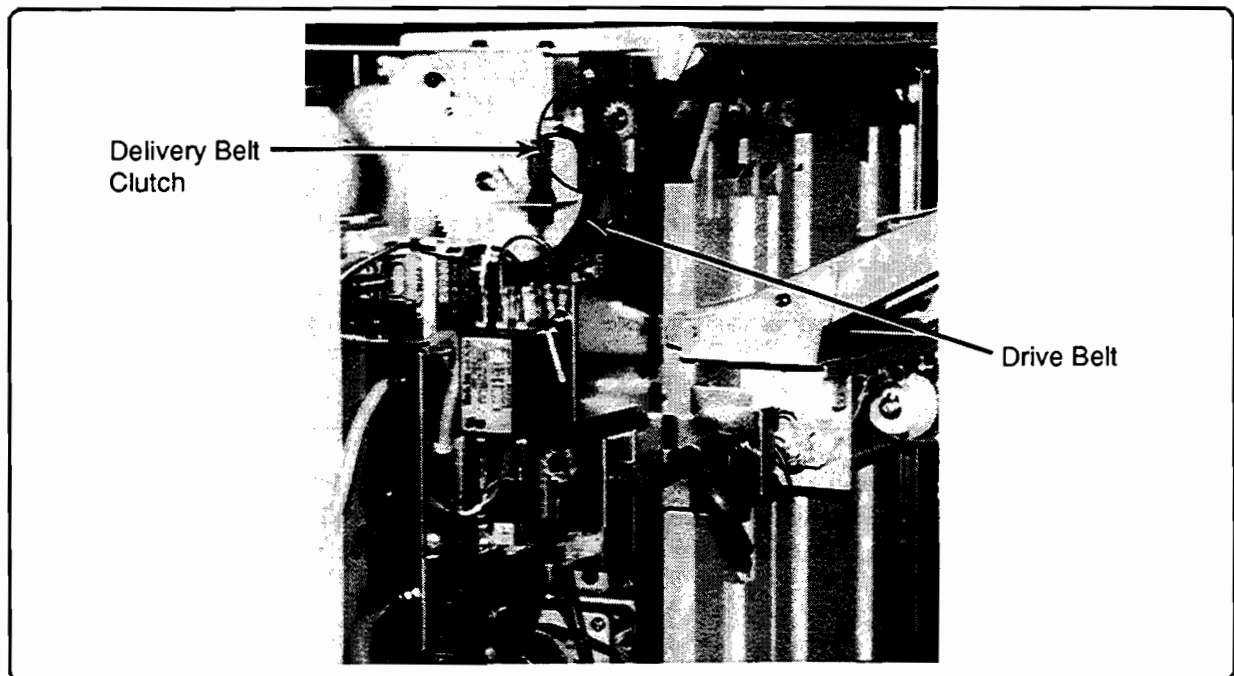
Stacker Drive Belt and Delivery Belt Clutch
